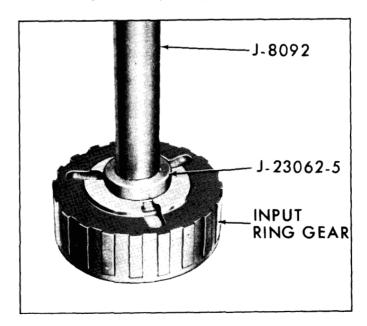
Installing Input Ring Gear Support to Bushing
